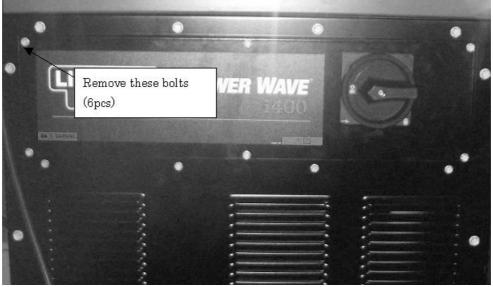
(c) Remove cover of welding power supply
